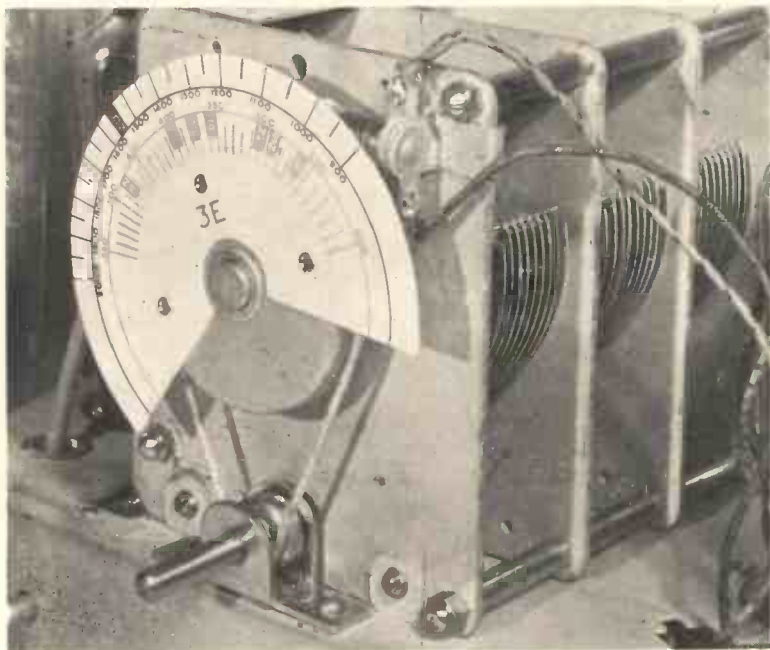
THE SCALE AND DRIVE ASSEMBLY.
